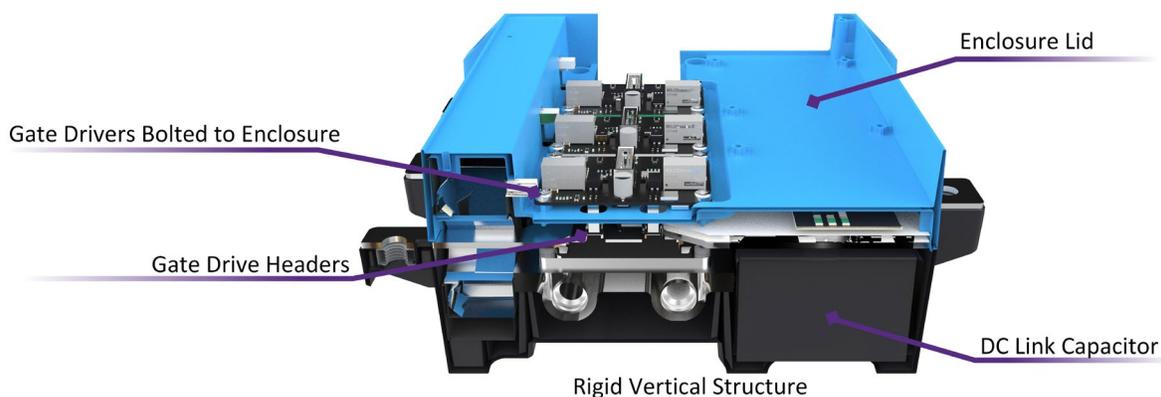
Wolfspeed XM3 inverter reference design: gate drive mounting
